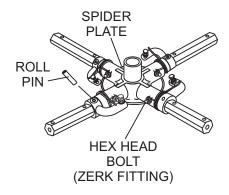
Removing Roll Pin and Zerk Grease Fitting
